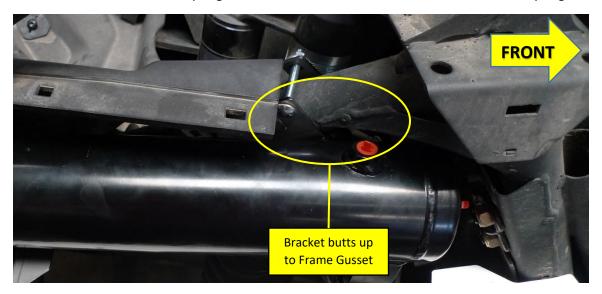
Front Air Tank Bracket Stops at Corner Gusset (shown with air tank)
